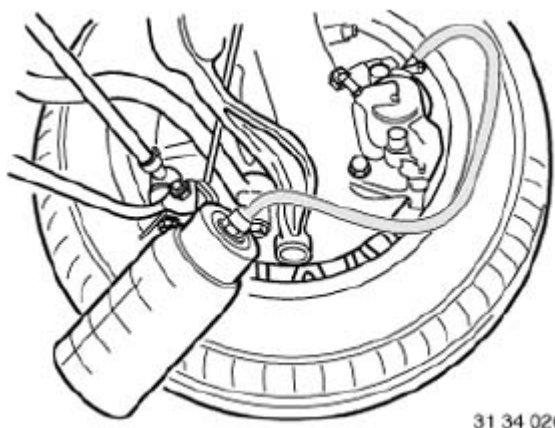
Connecting Bleeder Hose With Collecting Tray To Bleeder Valve
